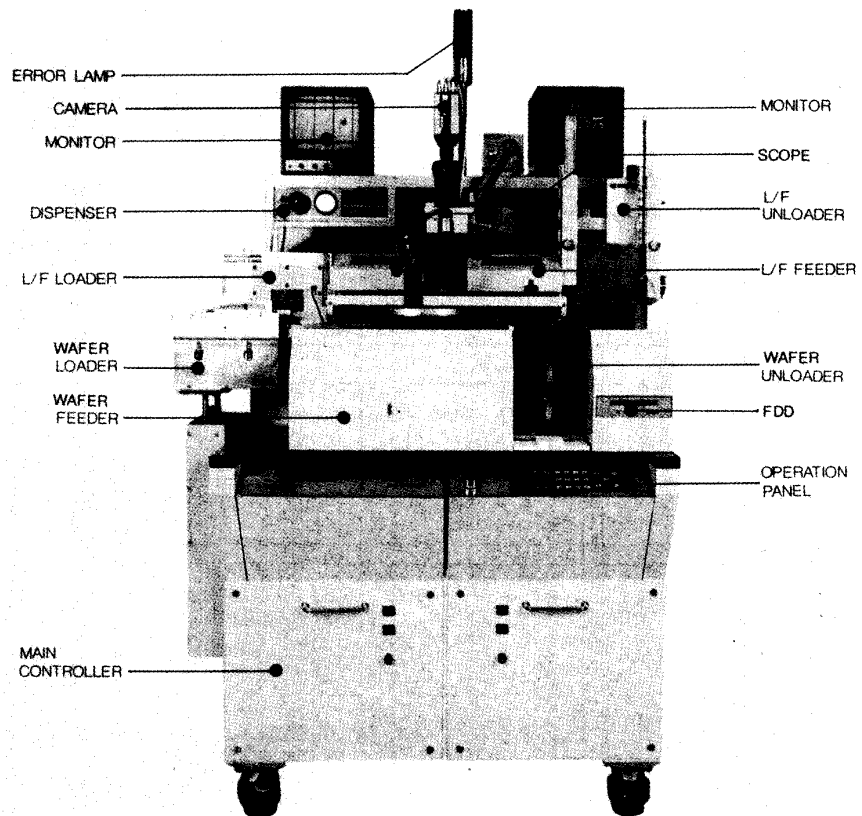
Laboratory-developed semiconductor die bonder machine.
